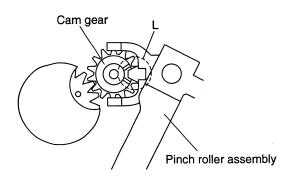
Gear Positioning 5 (Top Side View)
